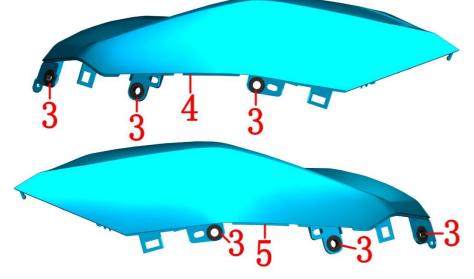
FUEL TANK		Fuel tank trim kit	CHK	0
